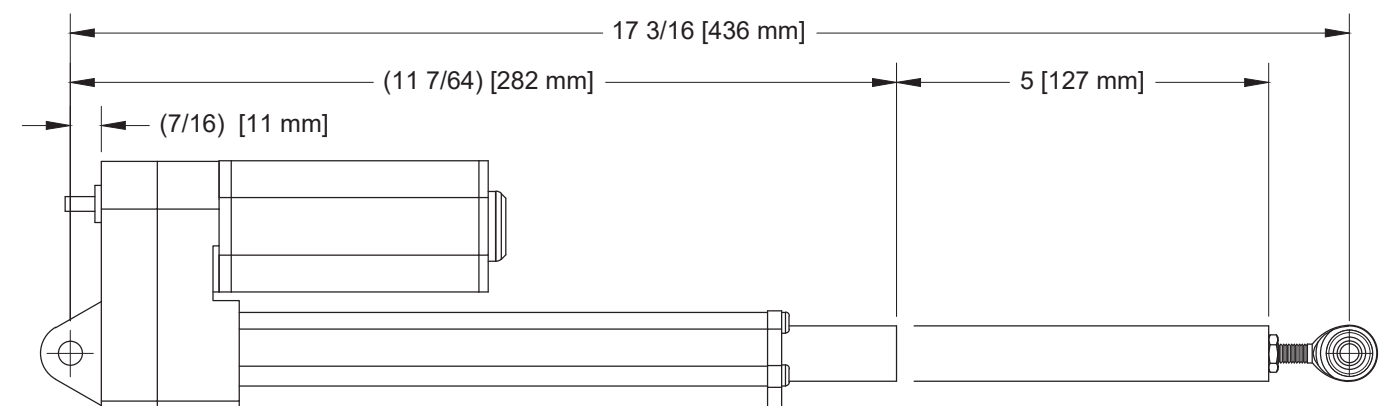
FLAP MOTOR EXTENDED & RETRACTED LENGTHS
